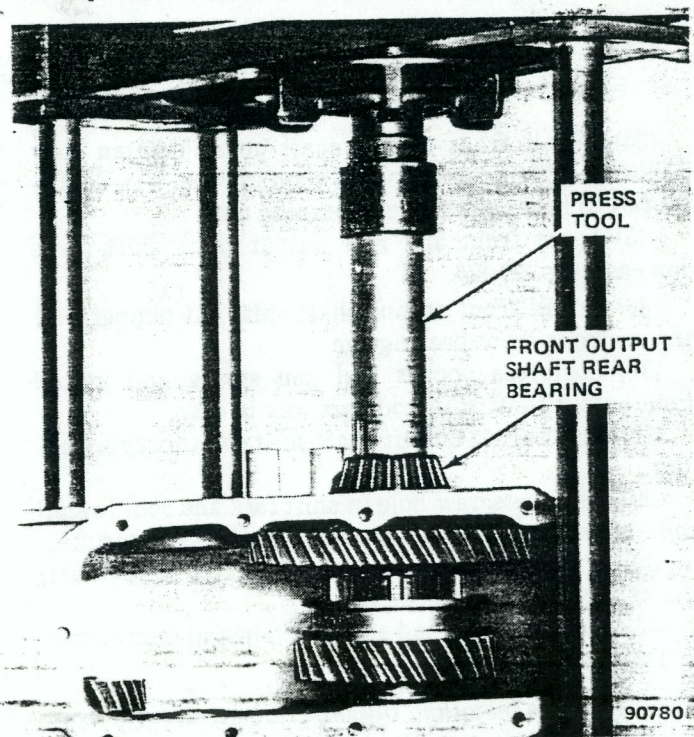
D-82 Front Output Shaft Rear Bearing Installation
